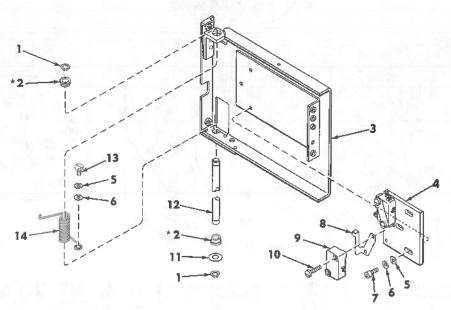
MODULATOR /8172445/-PARTIAL EXPLODED VIEW
